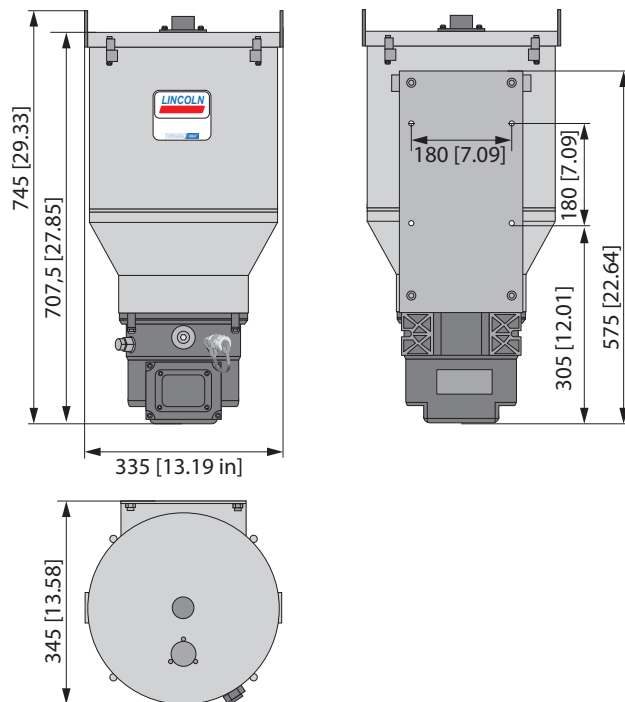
Minimum installation dimensions 40 Litres sheet steel reservoir
